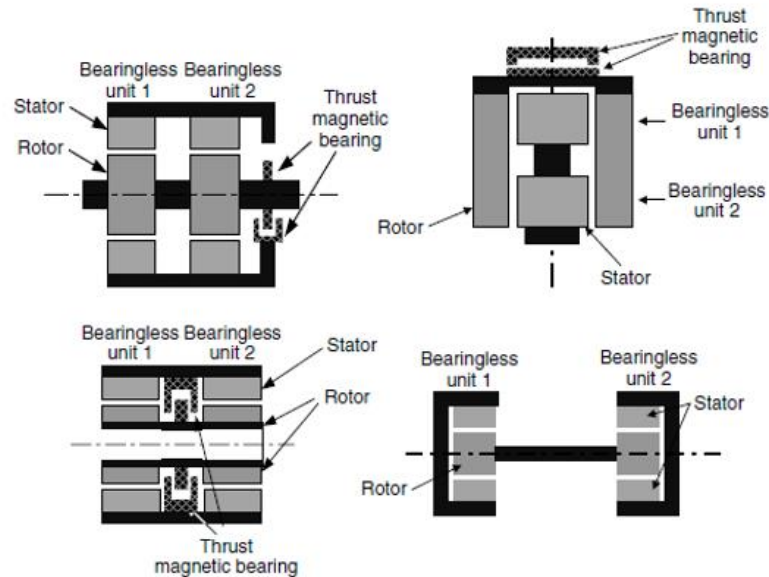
Twin bearingless drives with 5 and 4 axis suspension [3]
